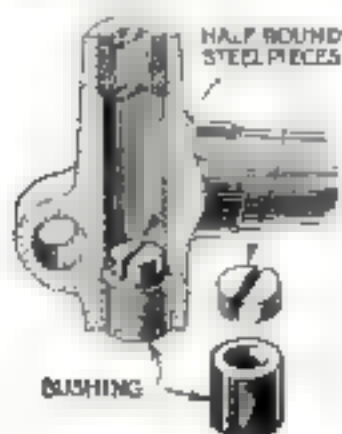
To take out spindle bushings, a soft steel disk cut in the shape of a half-moon has been devised.
